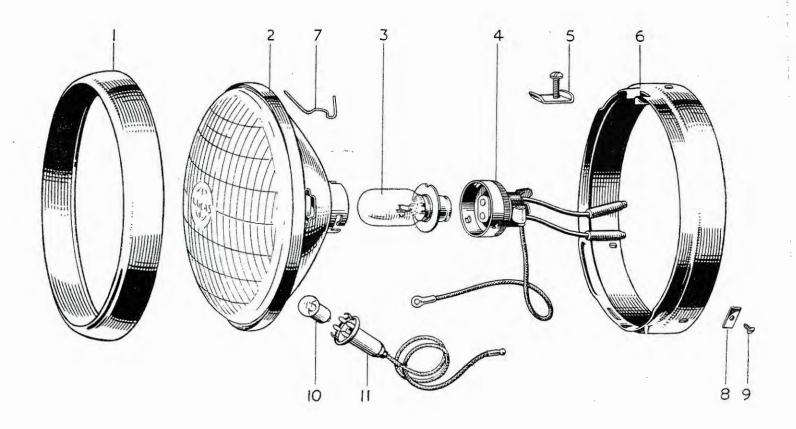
LUCAS HEADLAMP TYPE MCF700P
